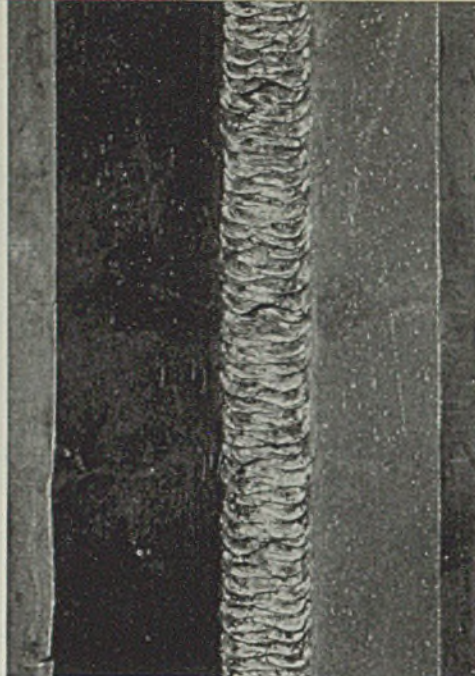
Vertical fillet weld made with an all-position electrode in 1-inch plate
